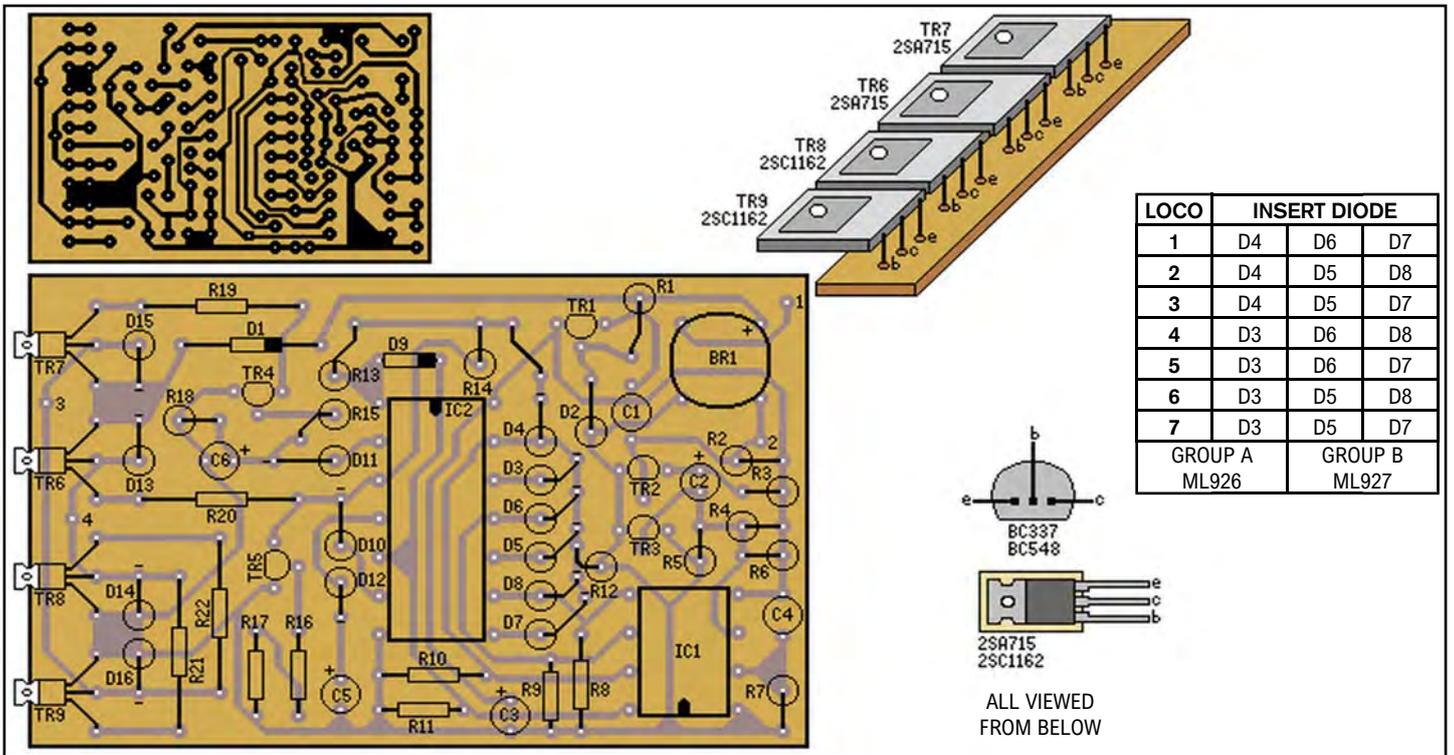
(a). Receiver board 2 track layout and component overlay. (b). Receiver board 2 transistor mounting.
